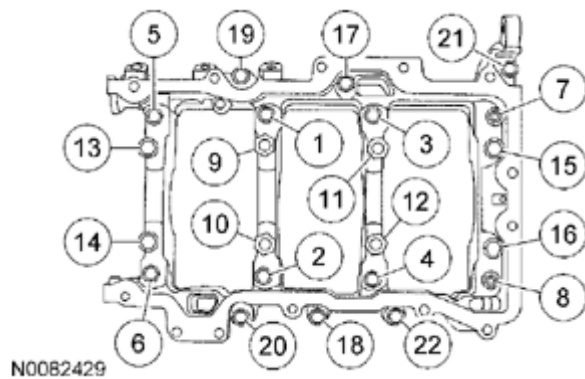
Identifying Lower Cylinder Block Bolts And Studs Tightening Sequence
